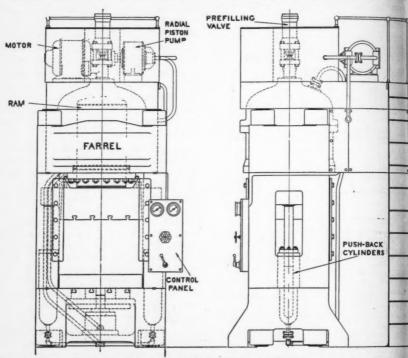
Front and side elevations of a typical hydraulic metal forming press with self-contains pumping unit. This press is the moving-down type, with push-back cylinders to return is moving platen to the starting position.
